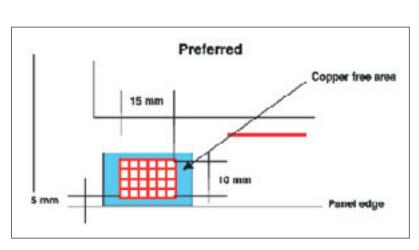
Preferred Copper pattern for welding using the inductive bonding machine
